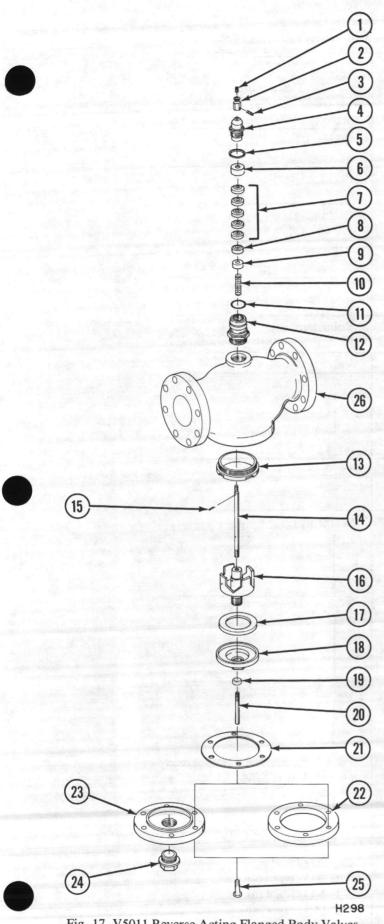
V5011 Reverse Acting Flanged Body Valves Exploded View.
